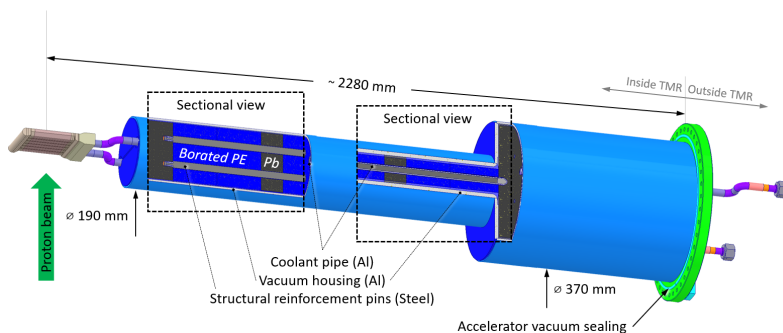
Design of the target plug with neutron-producing target at the front (left) and cooling water connections (left). The two sectional views into the interior show the layered shielding maintained by steel pins (left sectional view) and one cooling water line through a groove on the outside of the shielding (right sectional view). The entire plug is surrounded by an aluminium shell.
